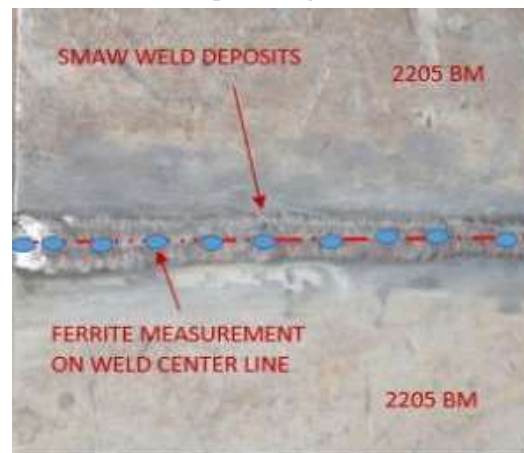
Ferrite measurement on 2205 weld deposits centre line using Feritscope Instrument
